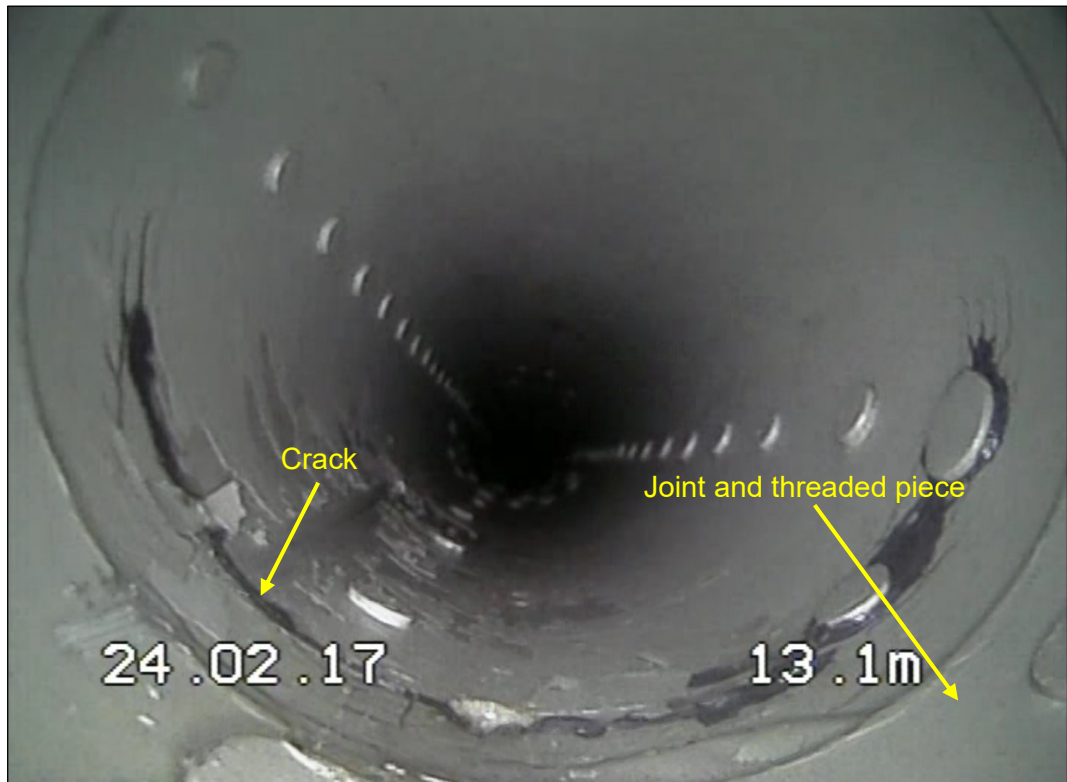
Interior view – crack in lower spar I of the centre wing, immediately next to the left-hand joint and threaded piece (borescope image). Photograph provided by Ju-Air.
